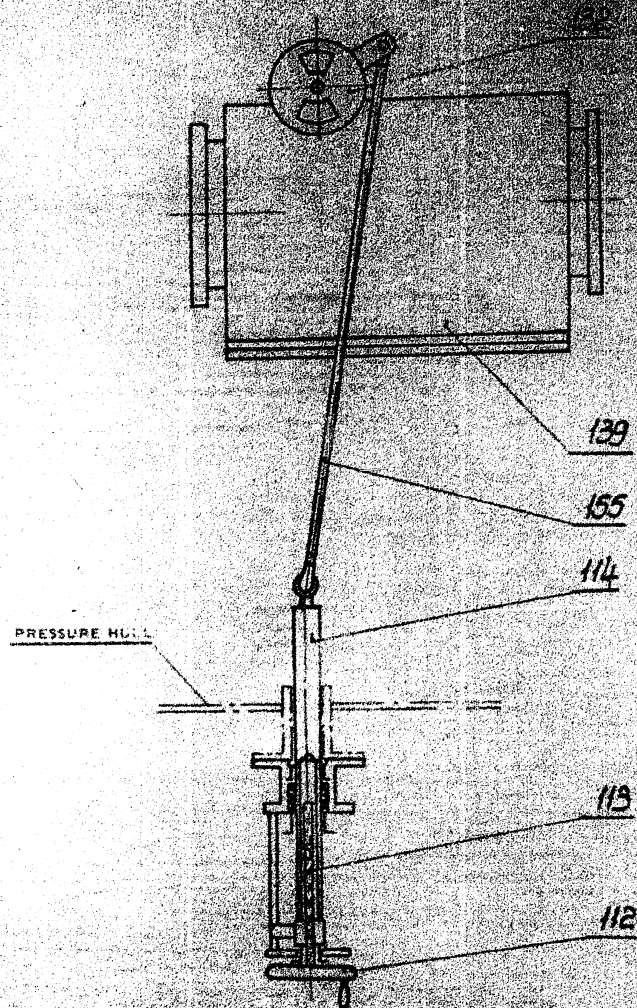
CONTROL GEARING MECHANISM OF VENTILATION VALVE
